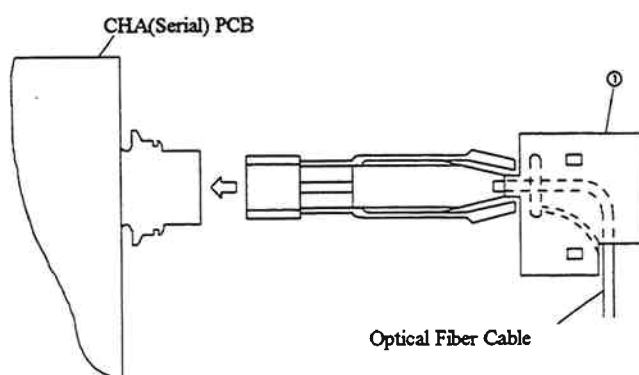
Connection of Optical Fiber Cable
